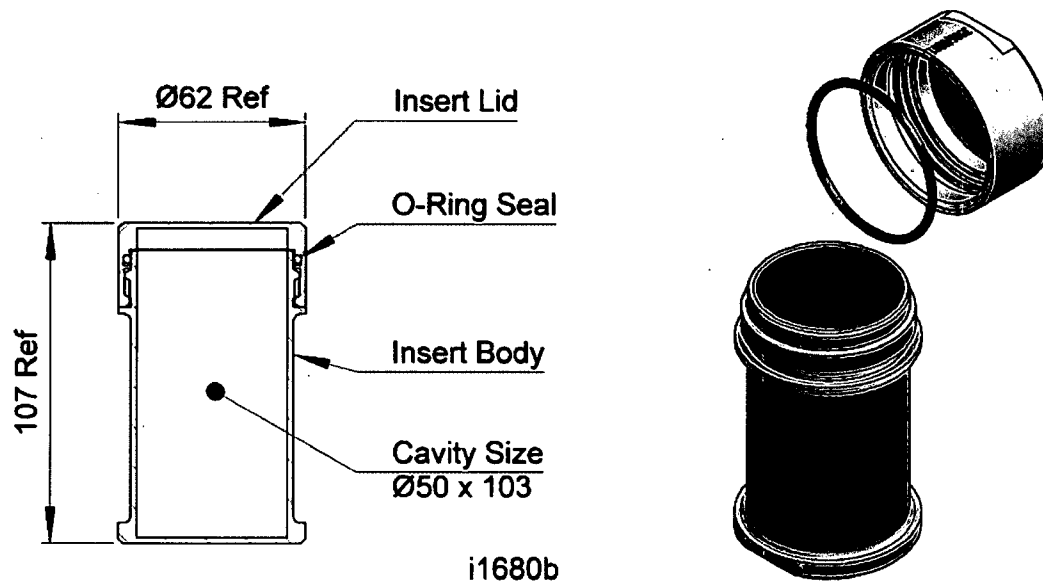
Shielding Insert LS-50x103-SS, Design No 3986
